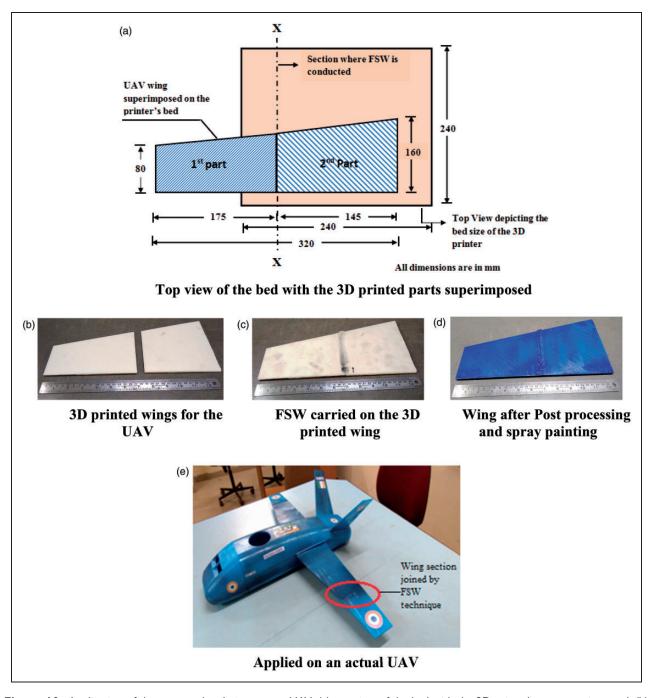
Application of the proposed technique on an UAV: (a) top view of the bed with the 3D printed parts superimposed; (b) 3D printed wings for the UAV; (c) FSW carried on the 3D printed wing; (d) wing after post processing and spray painting; (e) applied on an actual UAV.
